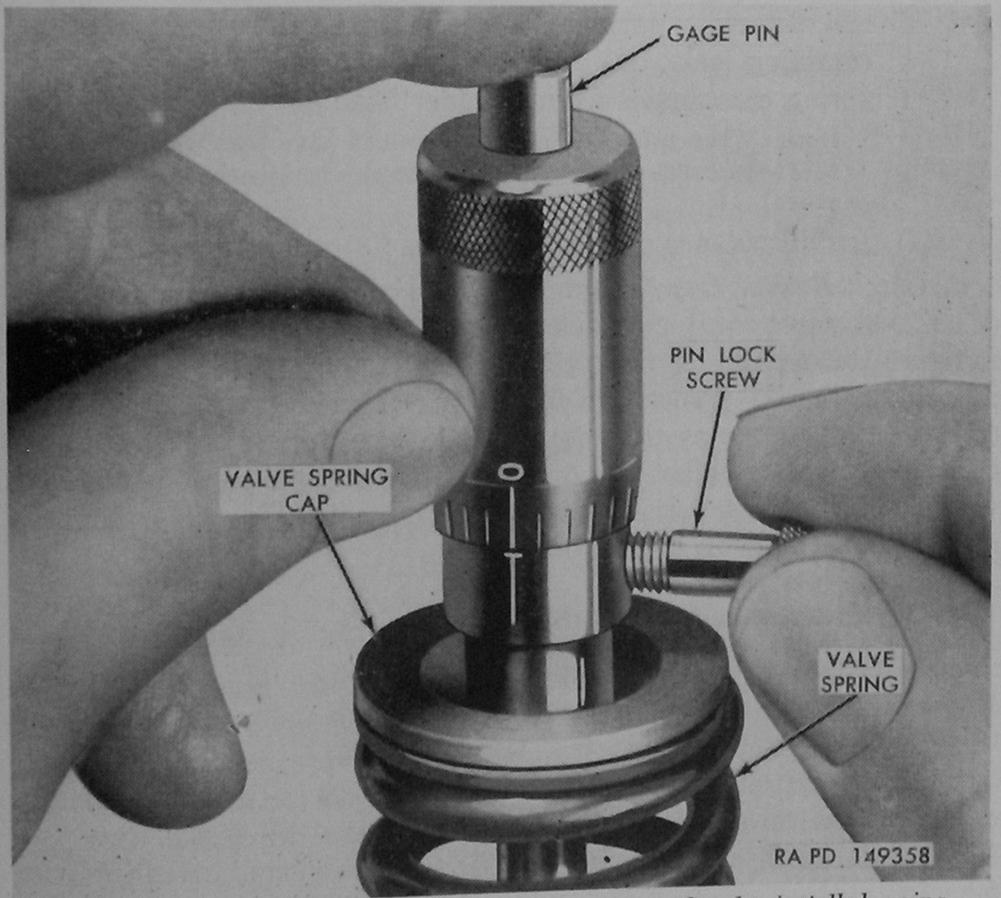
Checking valve rotator cap clearance with valve installed, using gage 7083104.
